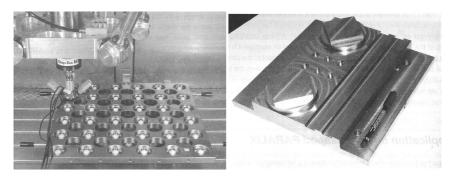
Measuring a ball plate [Bri06] (left) and executing a test workpiece [Alt04] (right)
